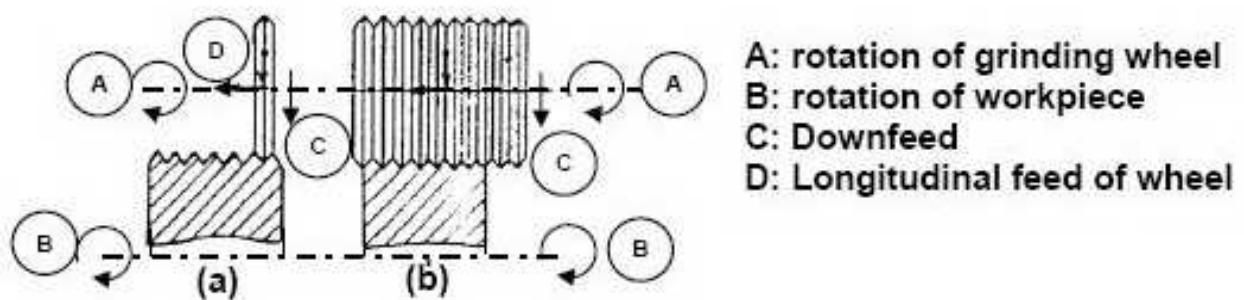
Thread grinding with (a) single rib (b) multi-ribbed wheel
